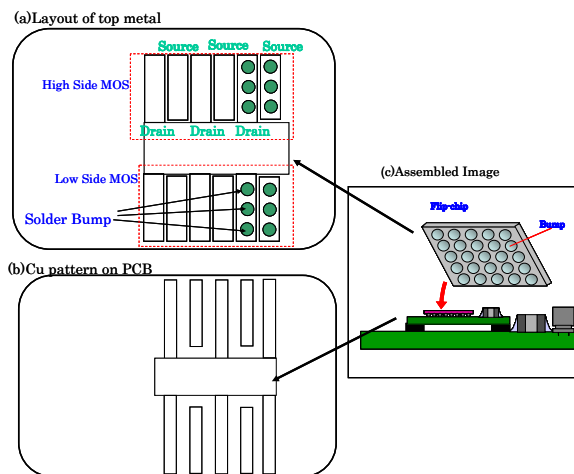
Assembled image, layout of top metal in IC and Cu pattern on printed circuit board (PCB). The drain and the source bumps are electrically connected by parallel running thick Cu metals in the PCB
